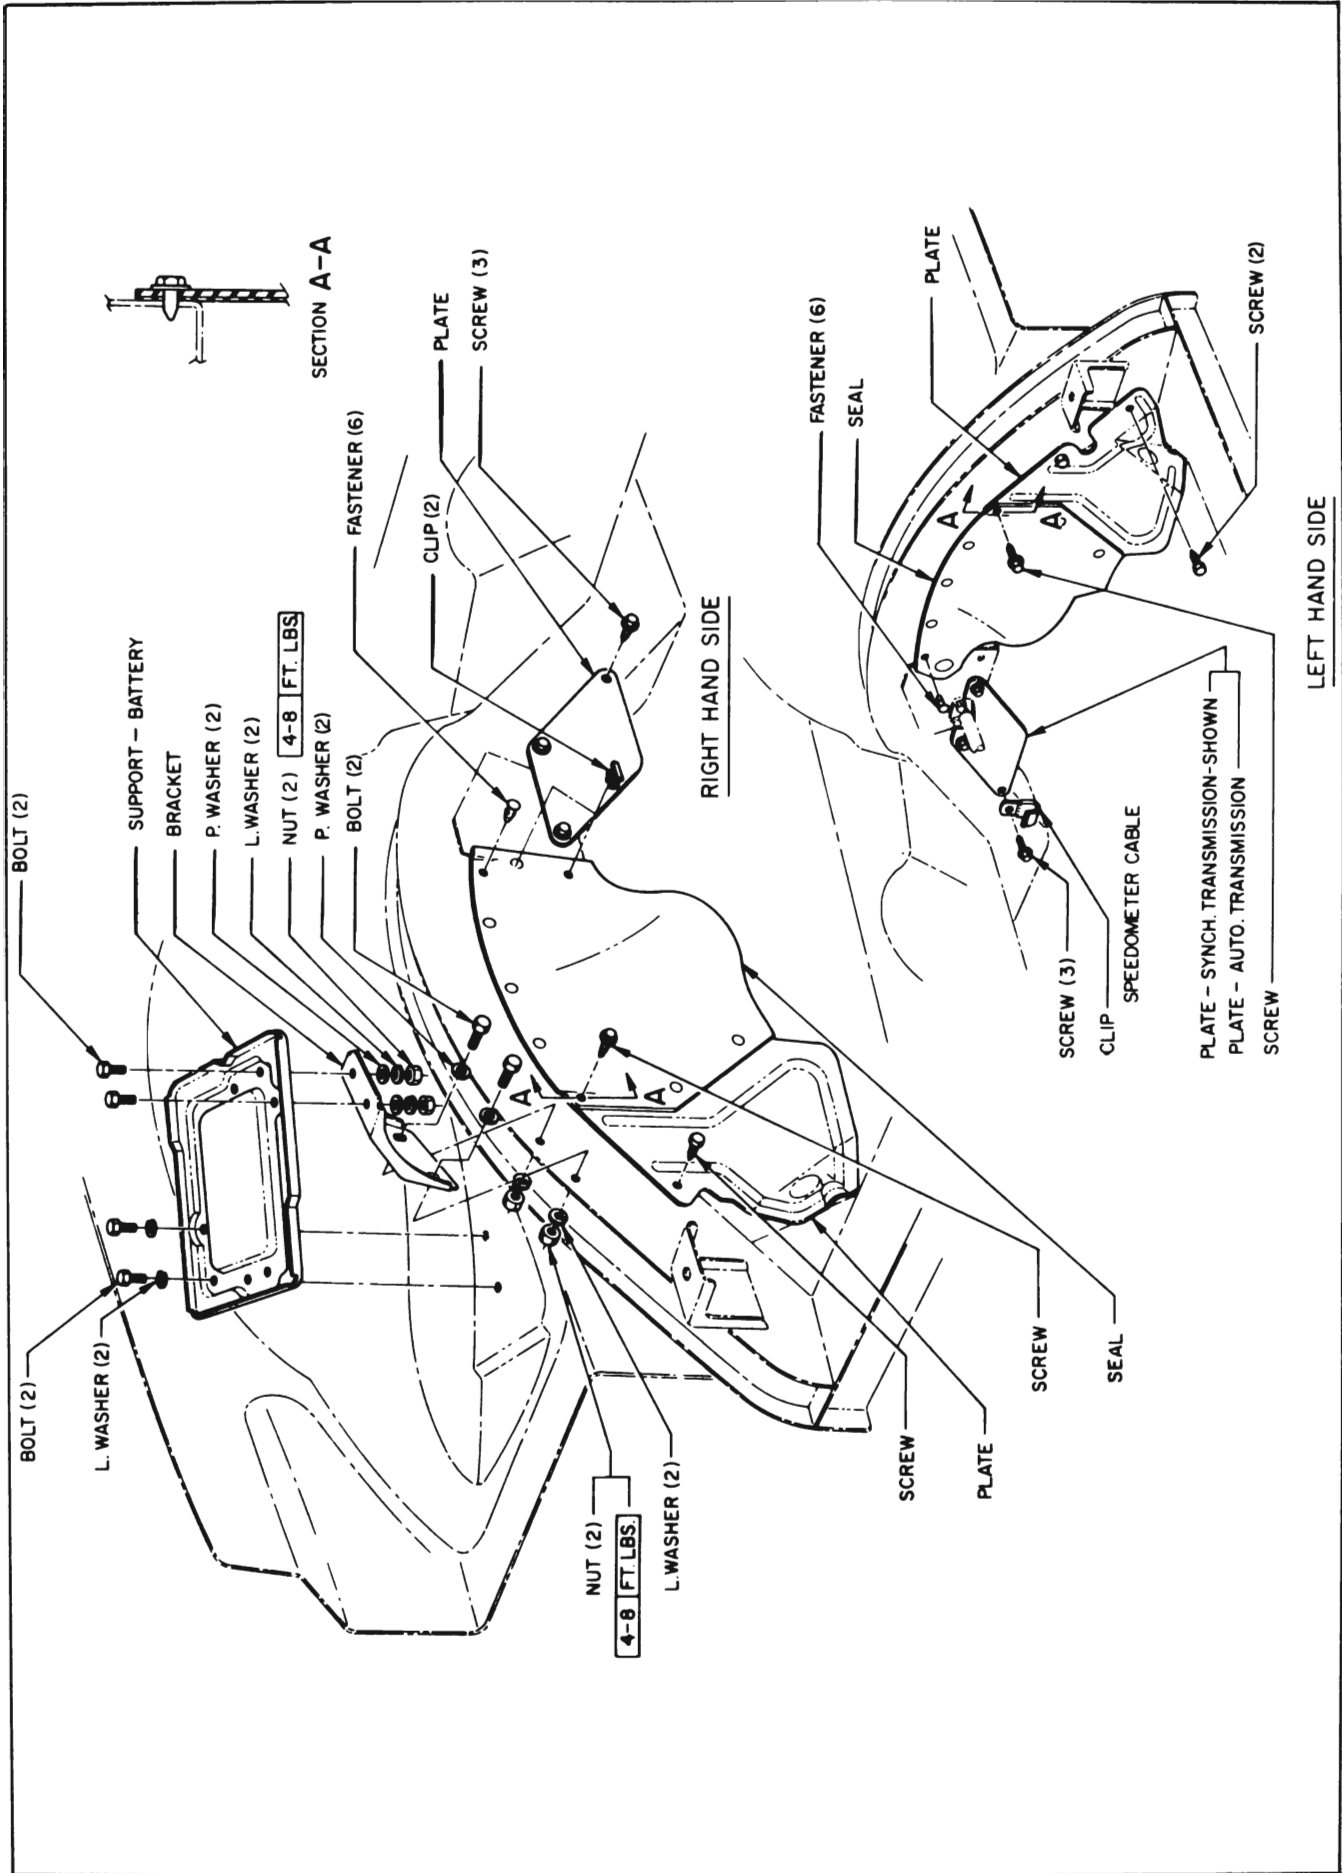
Battery Support, Engine Side Plate Fillers and Seals Installation
